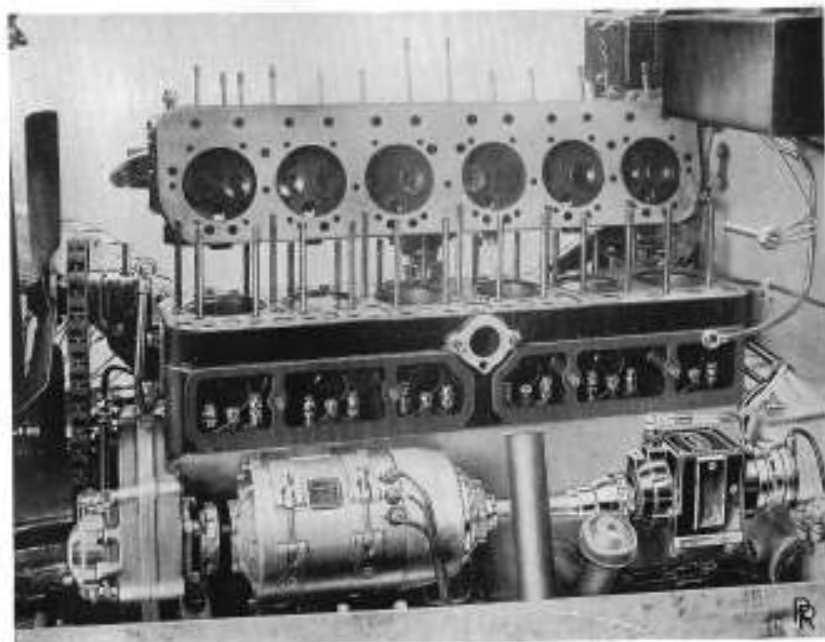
CYLINDER HEAD REMOVED FOR DECARBONISING.
